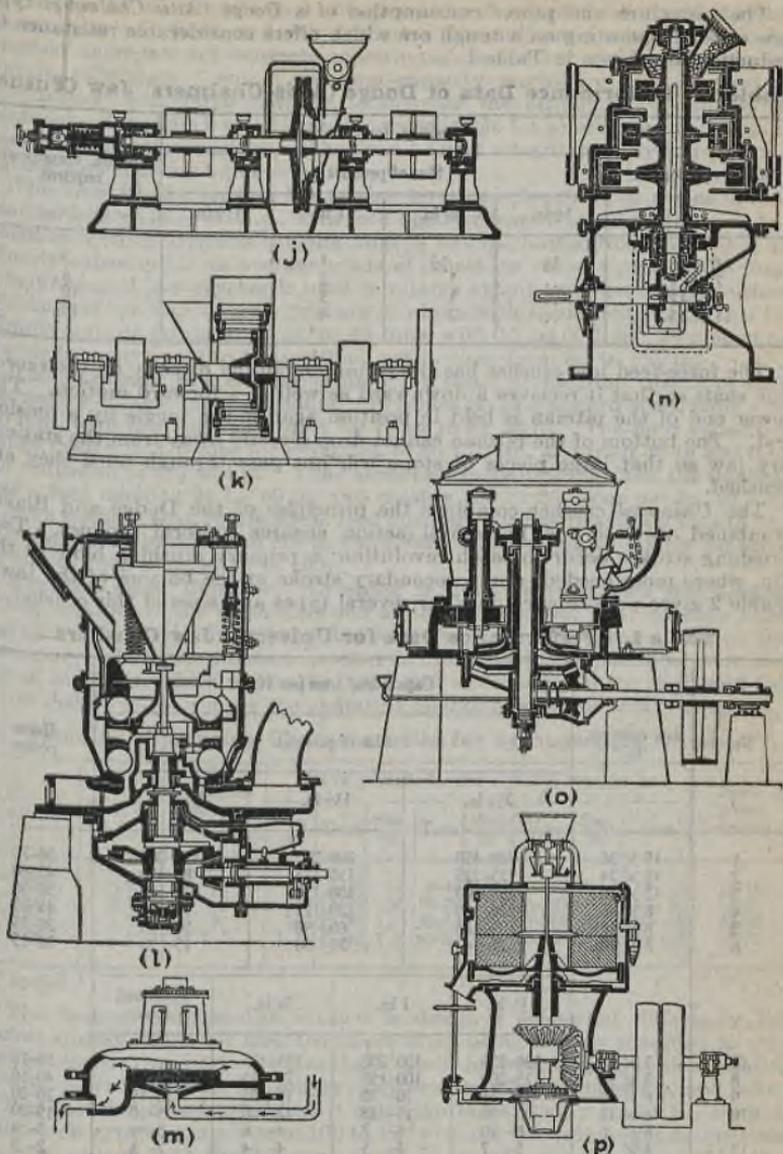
(Continued).—(j) Attrition mill; (k) disintegrator or multiple-cage mill; (l) Fuller air-separation mill; (m) colloid mill; (n) vertical-beater mill; (o) Raymond low-side air-separation mill; (p) buhrstone mill. (Badger and McCabe, "Elements of Chemical Engineering.")
